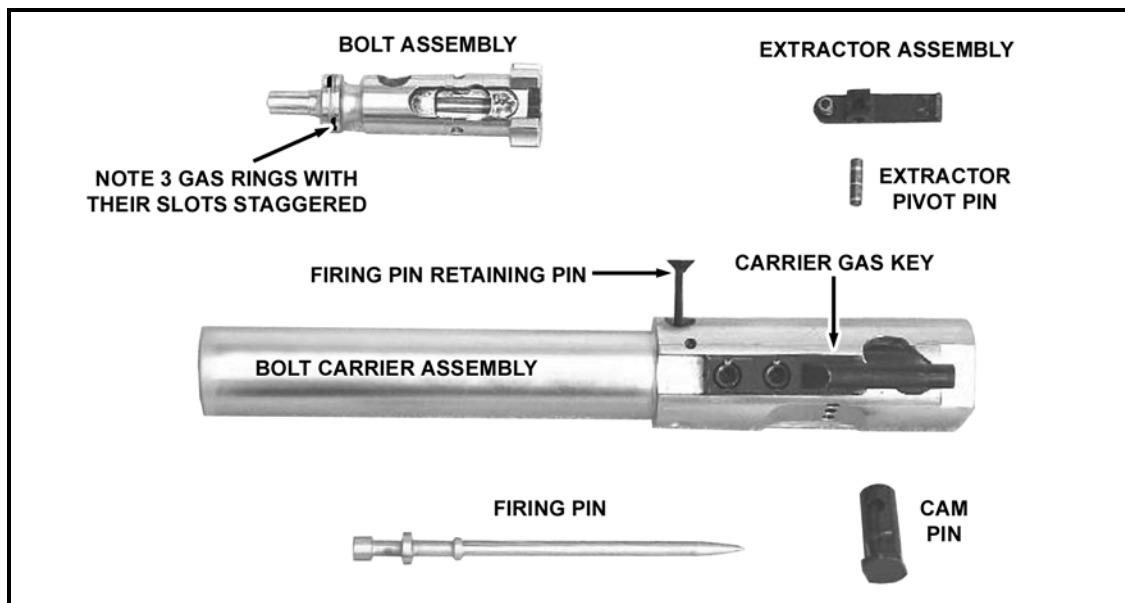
M110 Semiautomatic Sniper System bolt and carrier assembly field-stripped for cleaning, inspection, or lubrication.
